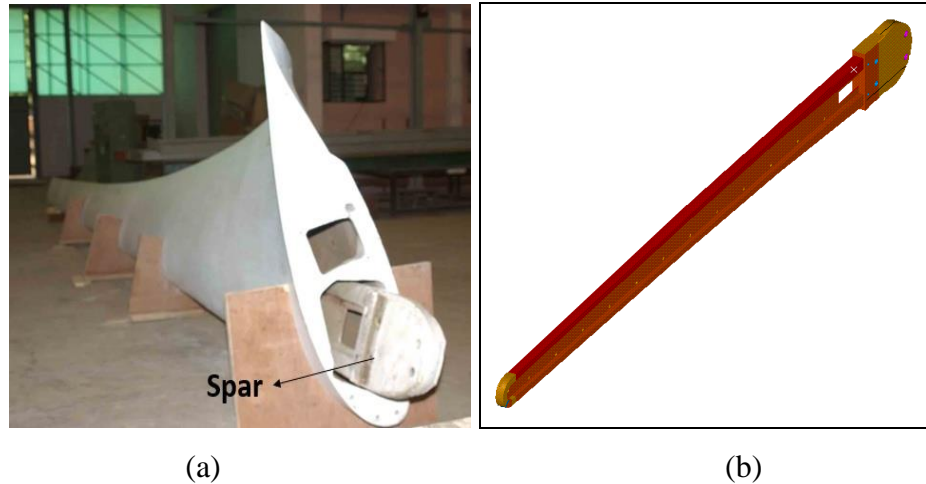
(a). Real time wind turbine blade spar assembly. (b). CAD model of blade spar.
